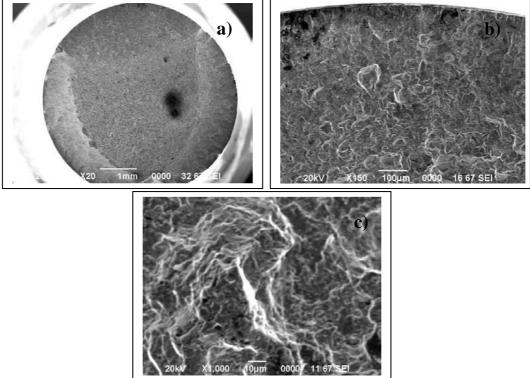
Fracture for 70% of the yield stress, showing the fatigue fracture surfaces with magnifications: 20X (a) 150X (b) 1000X and (c)
